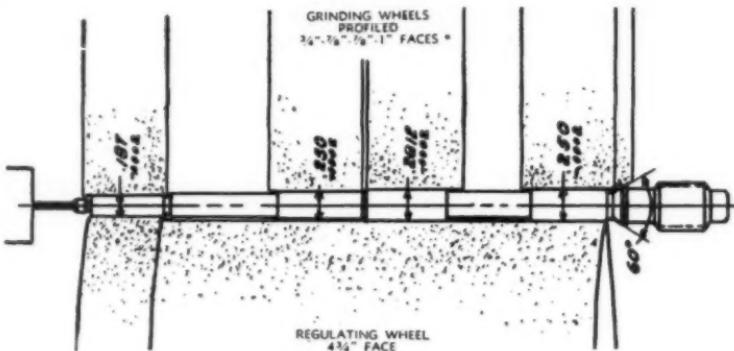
Here four diameters of a worm shaft are centerless ground simultaneously on a Landis machine, using multiple wheels instead of a single formed wheel. Production is 75 per hour.
